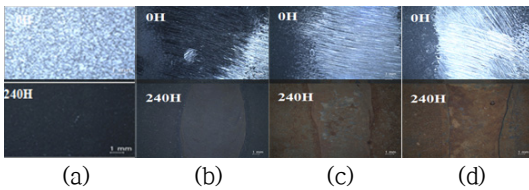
Appearance of 4 kinds of specimen during 240 hour in acidic solution. (a) As-received, (b) 250A weld, (c) 300A weld, (d) 350A weld
